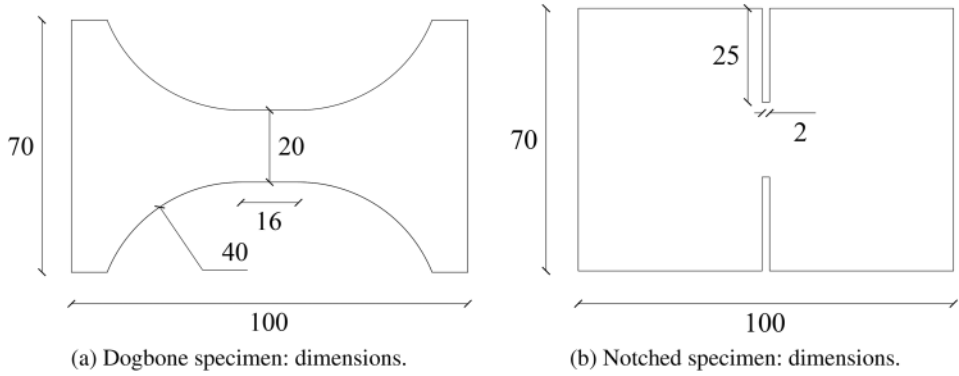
Geometrical dimensions of the simulated specimens in millimetres.
